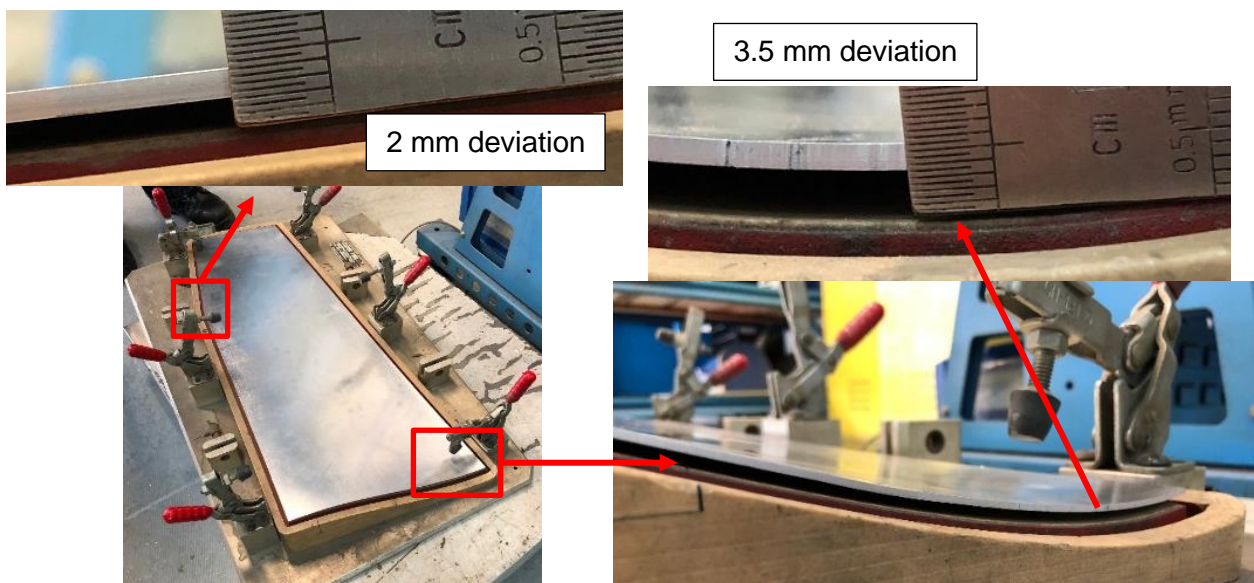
Aircraft skin panel component placed on the inspection check fixture
